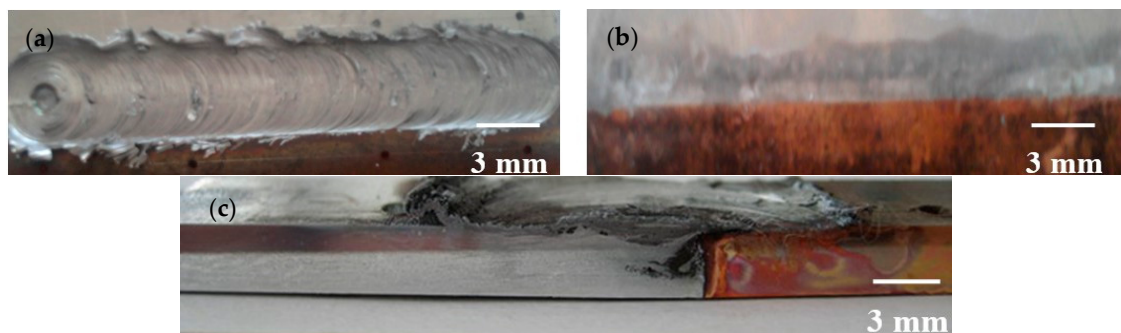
Macrograph of the welded part under 630/50/1 conditions: (a) Upper surface; (b) Lower surface; (c) Cross section.
